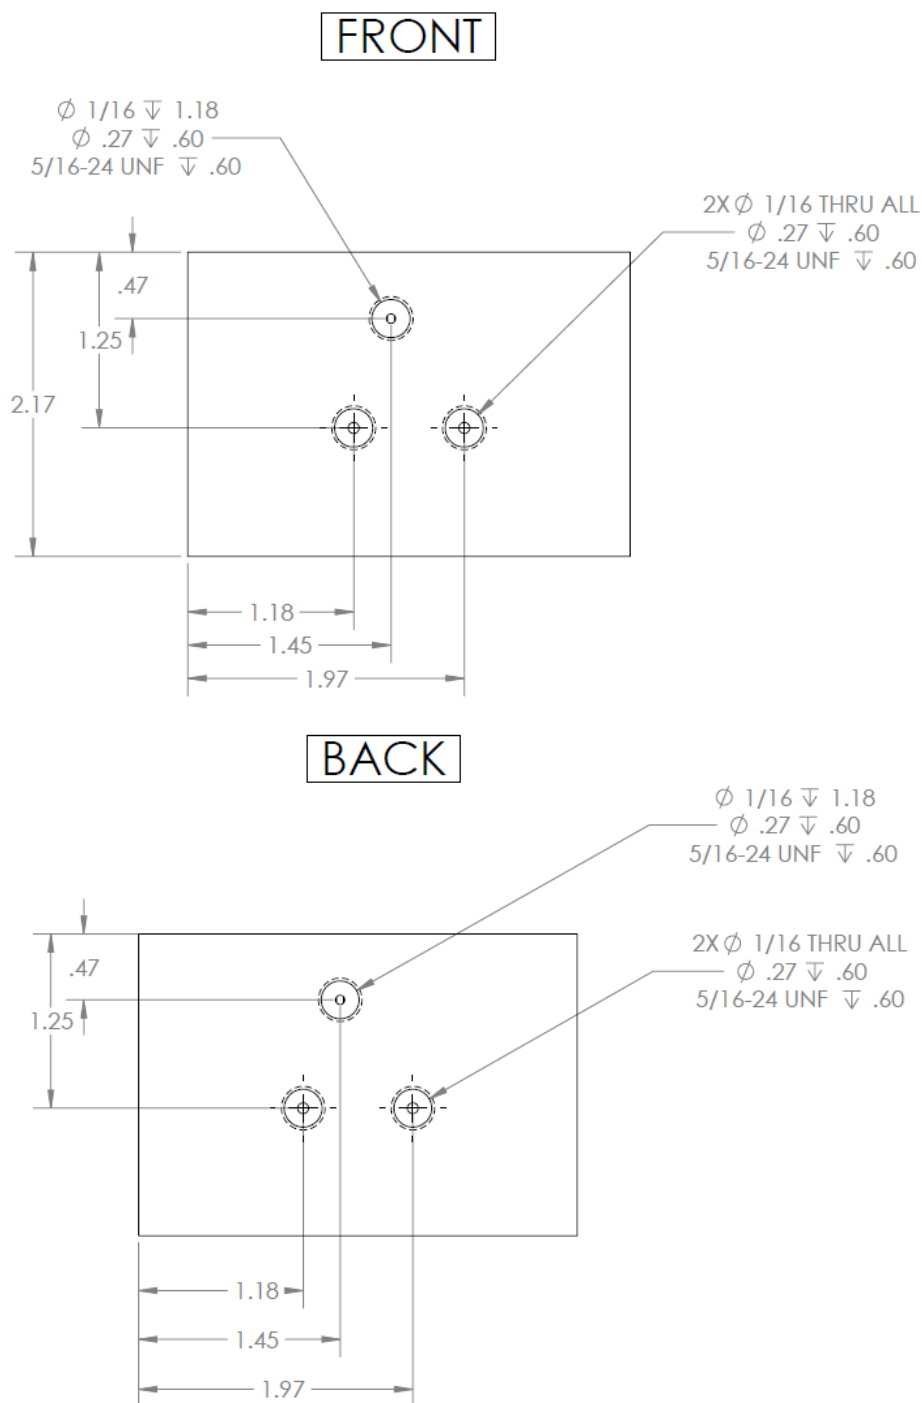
Technical drawings of the manifold base for the  $9 \times 9$  test vehicle; all dimensions in inches unless otherwise specified.
